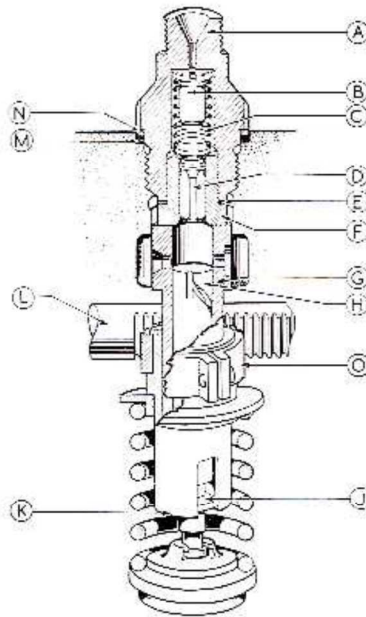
SECTION VIEW OF PUMPING ELEMENT AND DELIVERY VALVE
